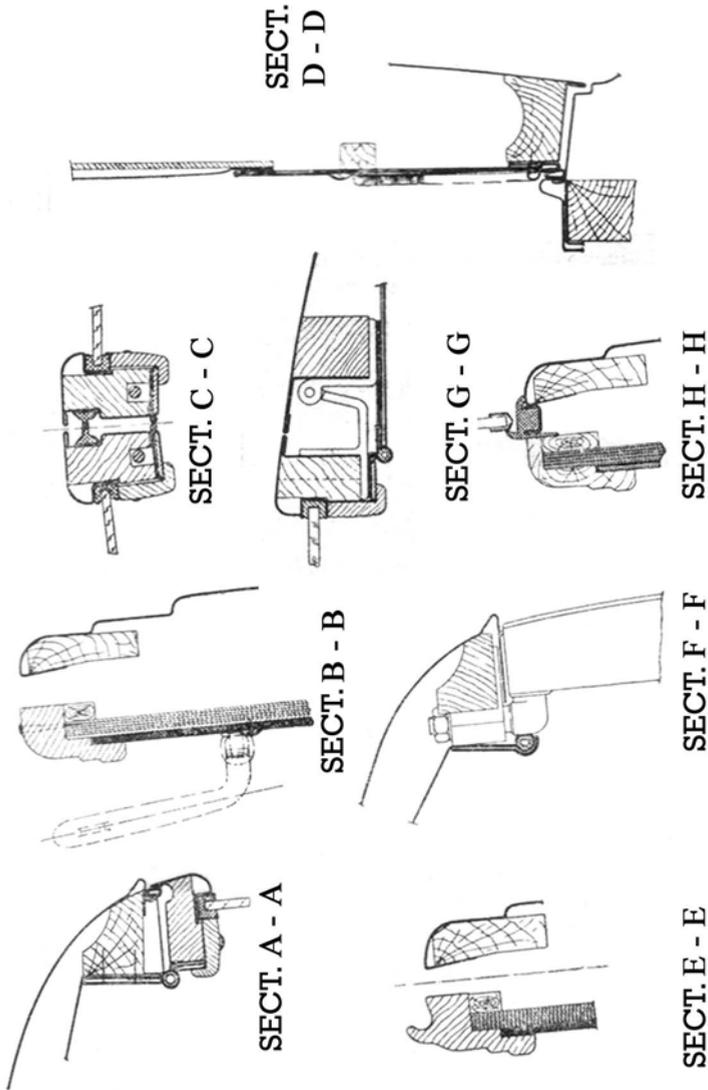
The perimetral skeleton of the body covering panels is completely made by wood (cross sections are referenced to previous figure); door panels (sections E-E, D-D, B-B, H-H) are also framed by wood. Sections A-A and G-G show the hinge mount of front and rear doors with wardrobe opening. Sections C-C and F-F show latch locks.
